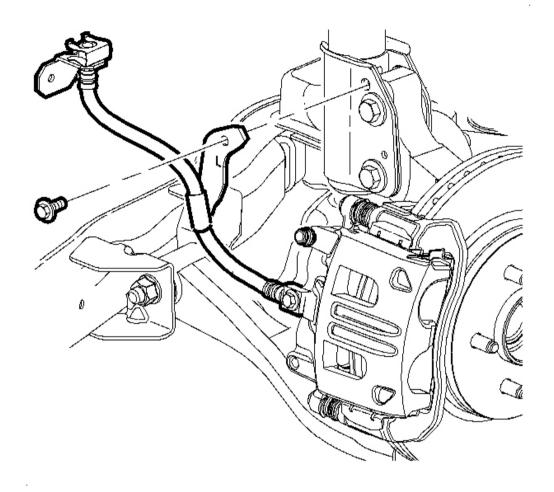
Brake Hose Bracket & Strut Assembly Courtesy of GENERAL MOTORS CORP.
